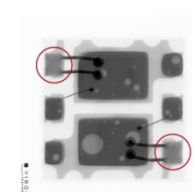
DFN2020-6 (SOT1118) without wettable side pads (4-D260): solder paste printing with fails
